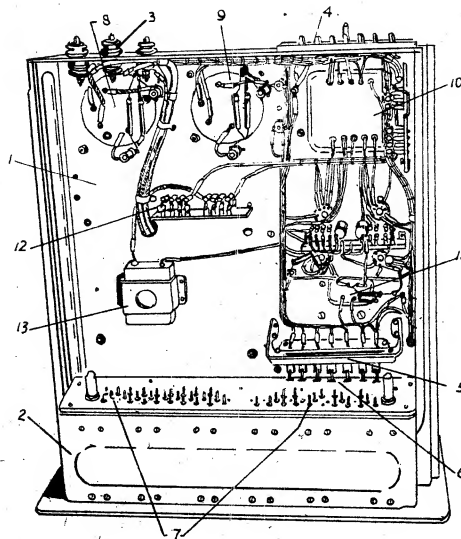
Transmitter audio frequency section (rear view with the shield removed):
